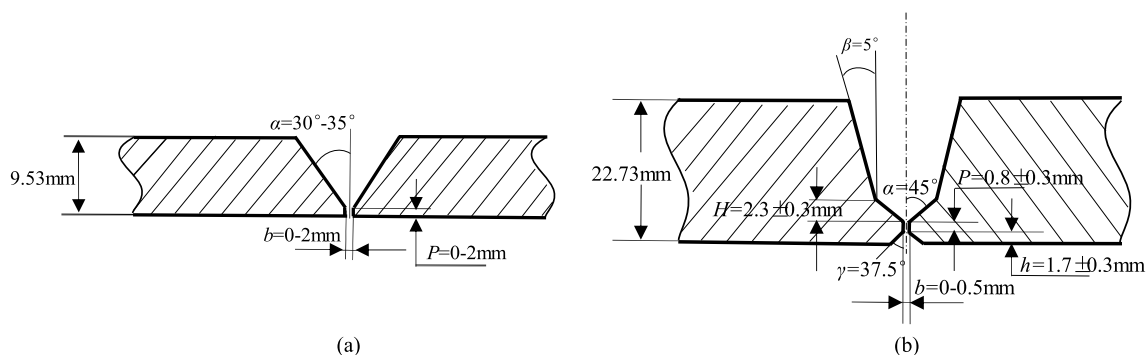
The cross-sectional dimensions of pipeline girth butt joint welding grooves: (a) Single V-shaped welding groove; (b) Double-V composite welding groove
